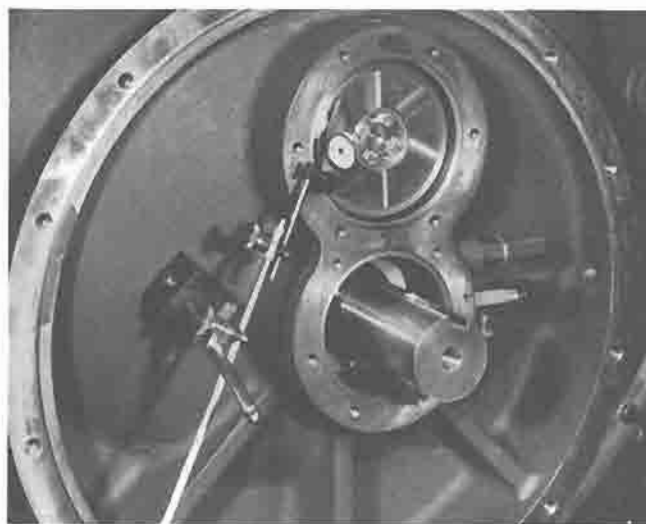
CHECKING HIGH-SPEED THRUST COLLAR RUN-OUT. MAX = .001" T.I.R.
